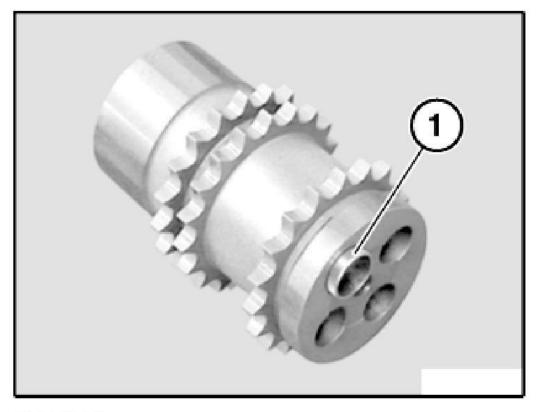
Identifying Screw In Sprocket Wheel Bore Courtesy of BMW OF NORTH AMERICA, INC.
